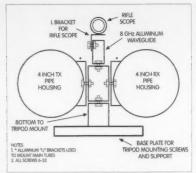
Rear view of mounting method to hold both 4-inch pipes to large rectangular center support and "U" brackets mounting and holding the pipes together. The main center mount was a large section of rectangular waveguide, but any stout aluminum tubing could be used here. Another section is attached to the main bottom tube to form an extension to attach to a tripod base plate, giving clearance for the 4-inch tubes.
